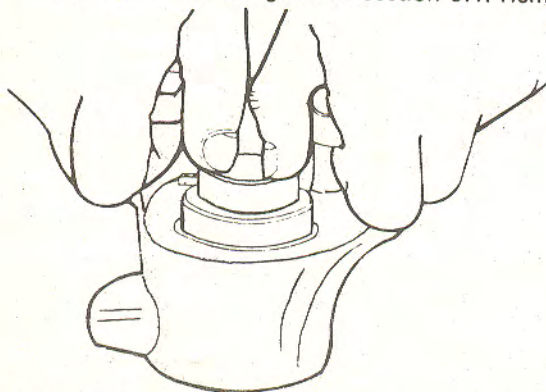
When assembling the brake caliper, carefully press in the piston with the two thumbs.
